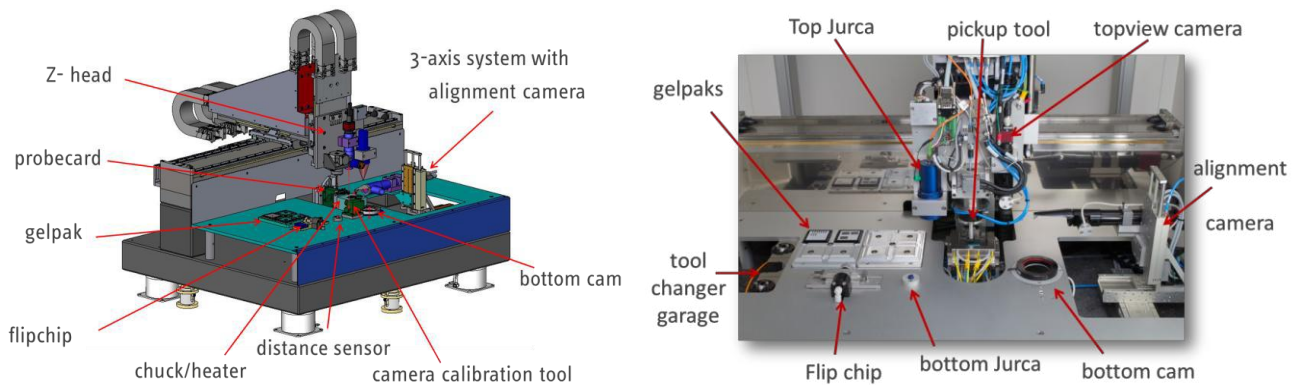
3D-drawing of assembly machine (left) and photograph of the interior of the assembly machine (right).
